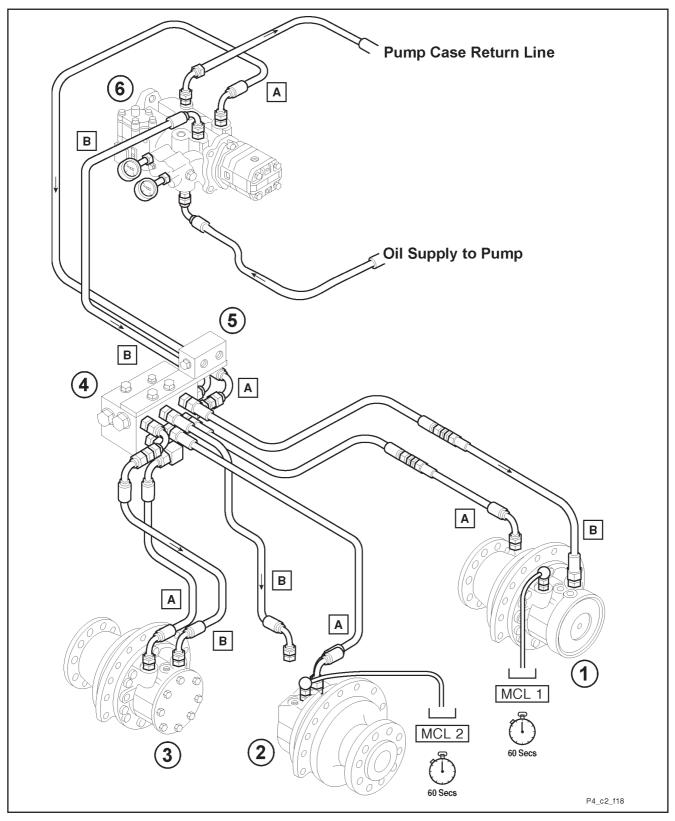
HYDROSTATIC WHEEL MOTOR CROSS PORT LEAKAGE TEST
